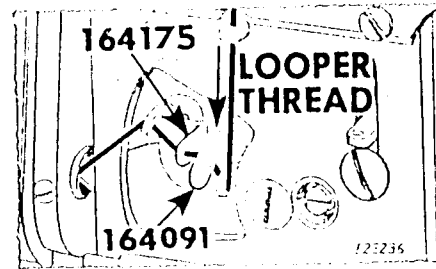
Threading Looper Take-up (Two-Thread Serging Stitch)
